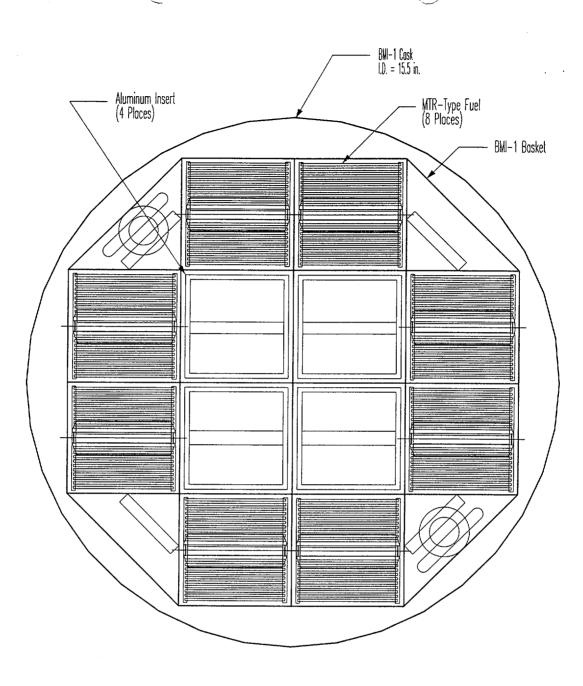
Loading configuration of LEU MTR-type fuel assemblies in the BMI-1 Cask. This diagram shows the location of the eight fuel assemblies loaded in the peripheral compartments of the BMI-1 basket and four aluminum inserts placed in the four center compartments of the basket.
